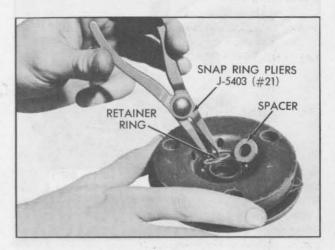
Removing Hub Retainer Ring and Spacer
